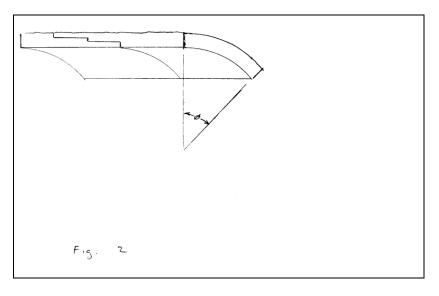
Calibration Standard for Bonded Pipe Joints (Pipe segments machined so that
